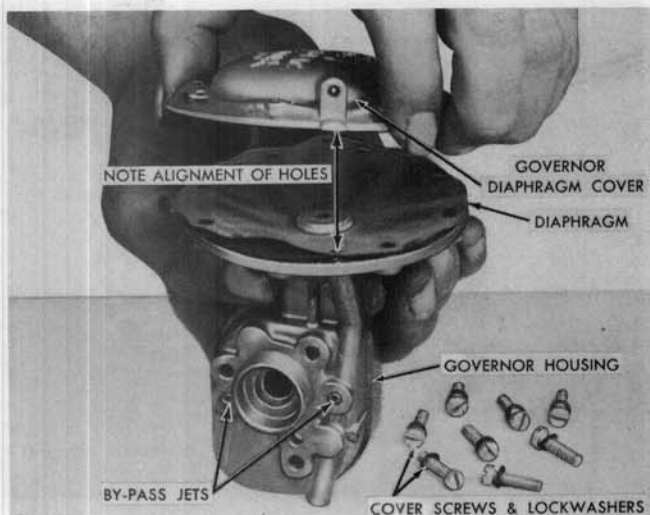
TIGHTENING GOVERNOR COVER PLATE SCREWS
